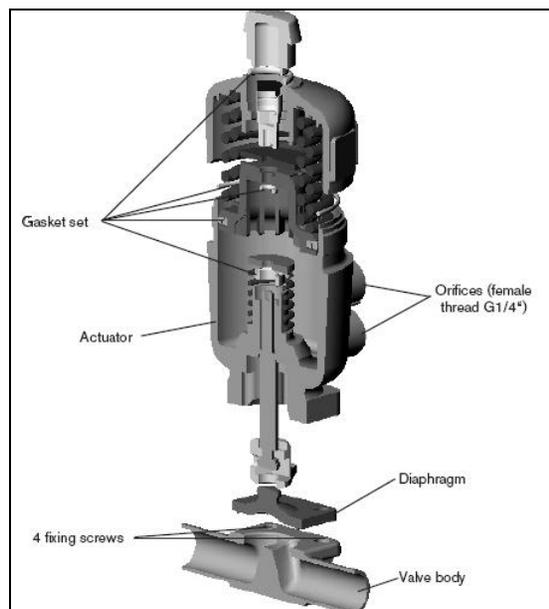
Disassembled drawing of the automatic diaphragm valve 2031
